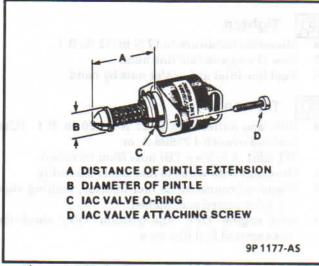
Flange-Mount IAC Valve - TBI 700
